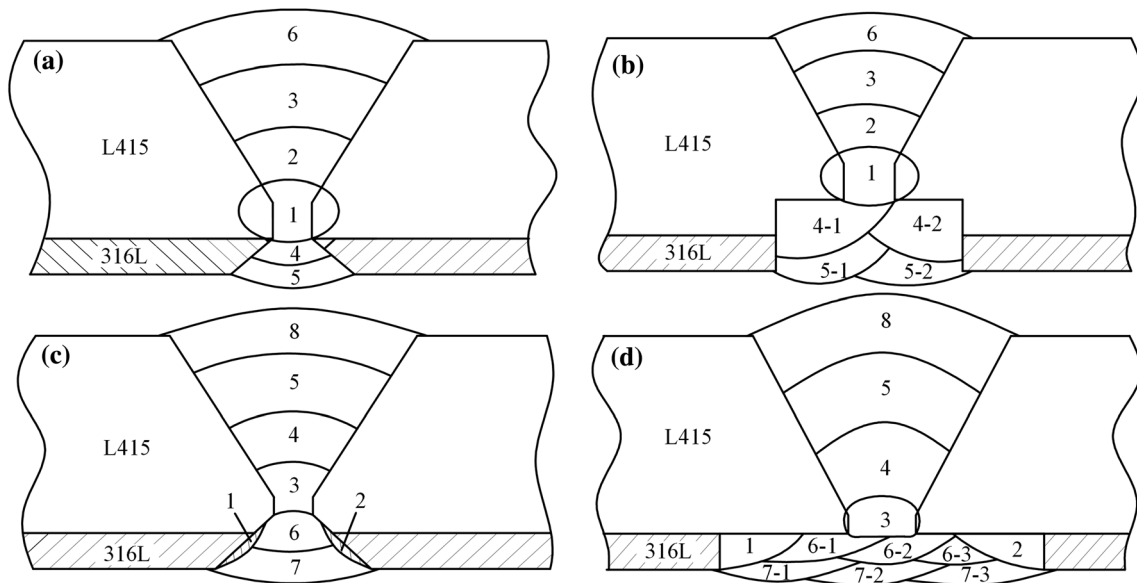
Welding sequence a groove A; b groove B; c groove C; d groove D
